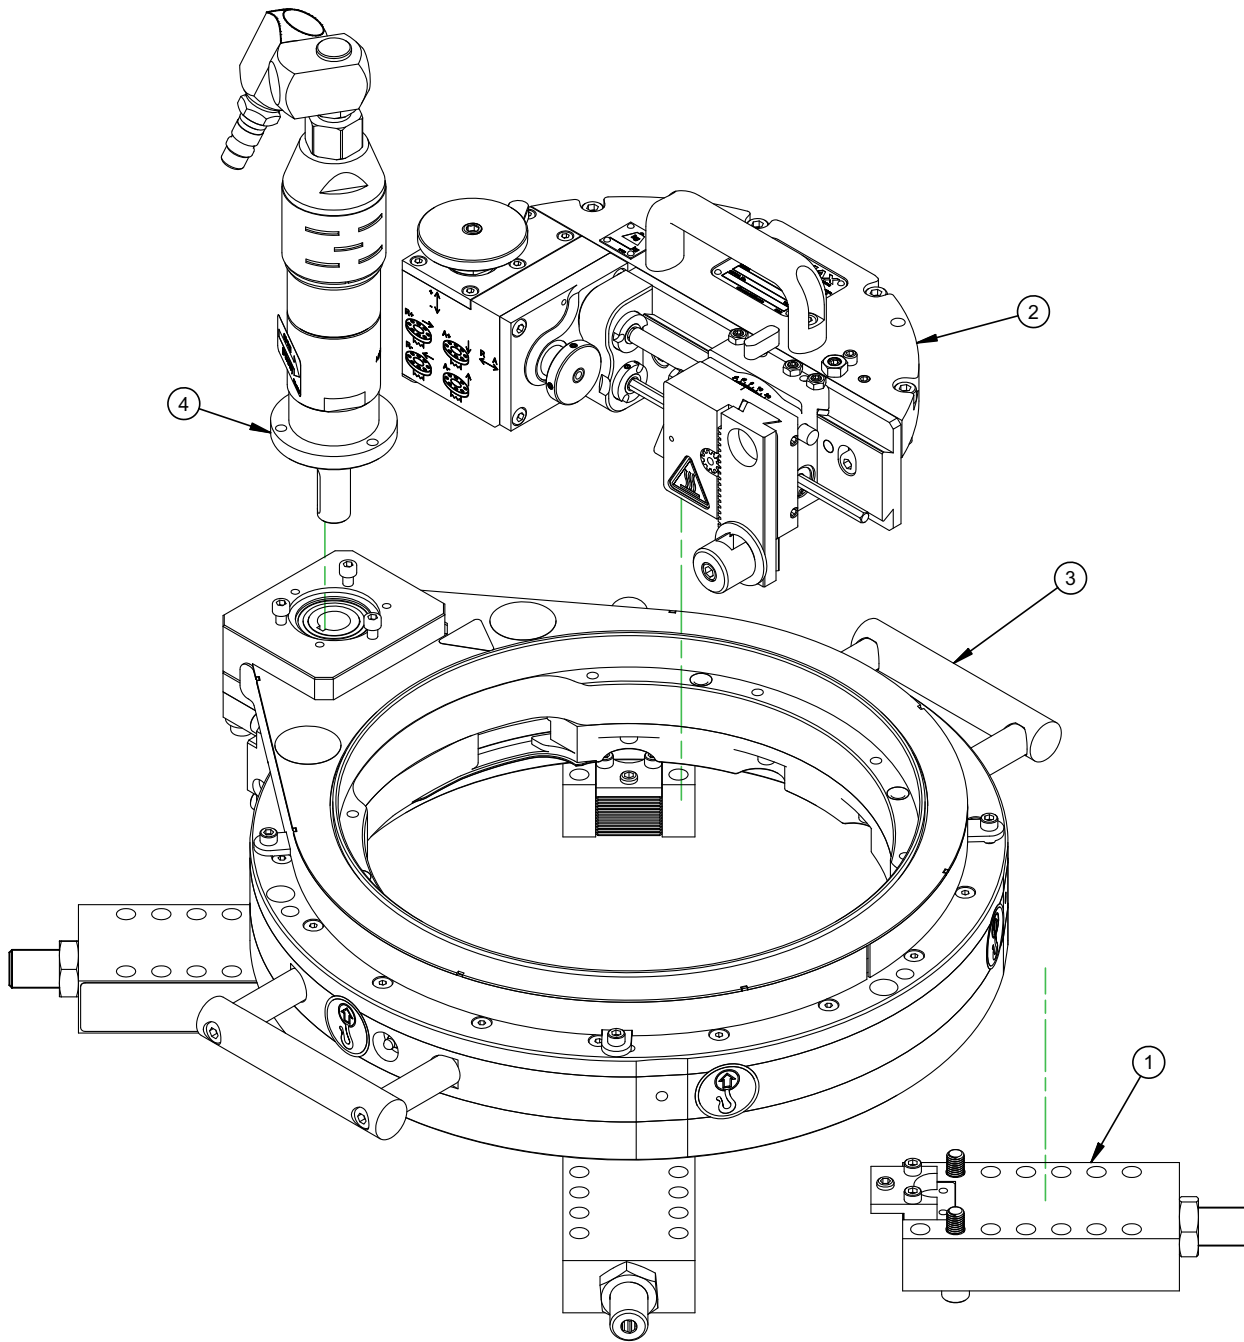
2.2 HP RIGHT ANGLE AIR MOTOR (P/N 80618) - - - - -100
